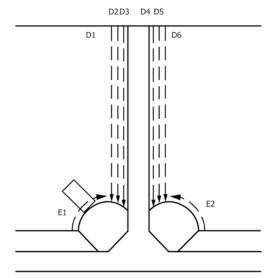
Scans of Vertical Cut Out Weld and Cut Out Surface
